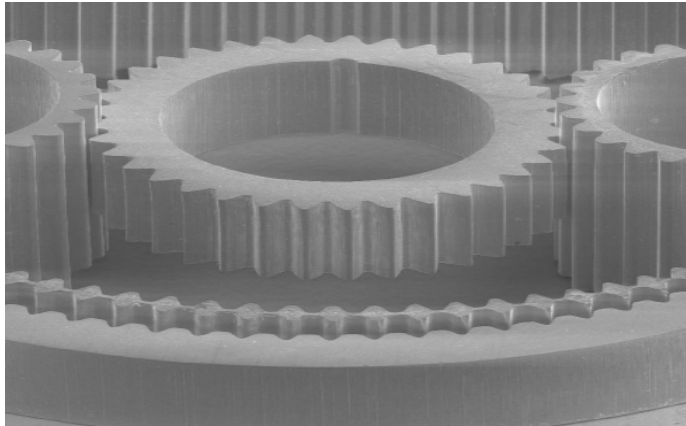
The central bore in the sun gear enables a hollow shaft
